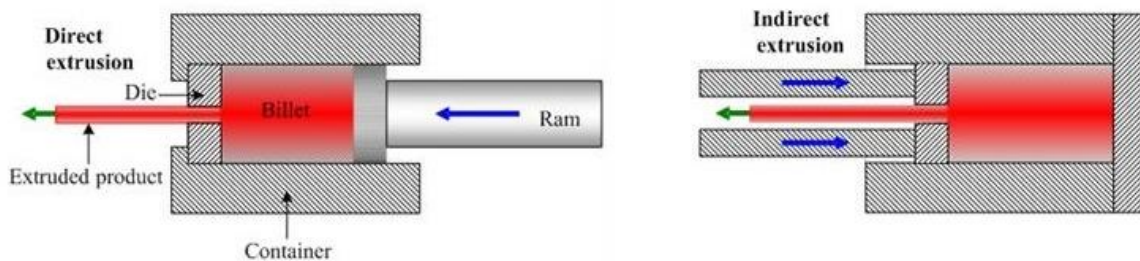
Extrusion methods: a) indirect extrusion; b) direct extrusion [5].
